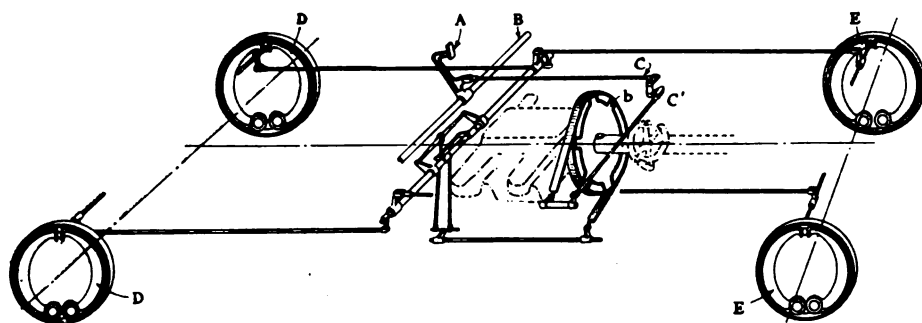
Diagram of servo-regulating operating mechanism for four-wheel brakes. A, pedal; B, pedal shaft; C, C', operating links of the servo brake band b; D, front wheel brakes; E, rear wheel brakes
